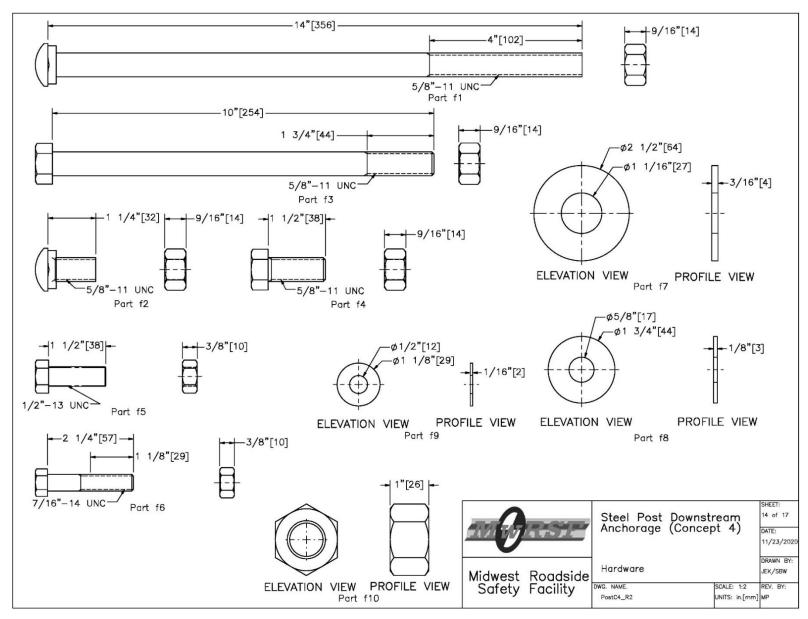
Bolt and Washer Details, Test No. SPDA-4
